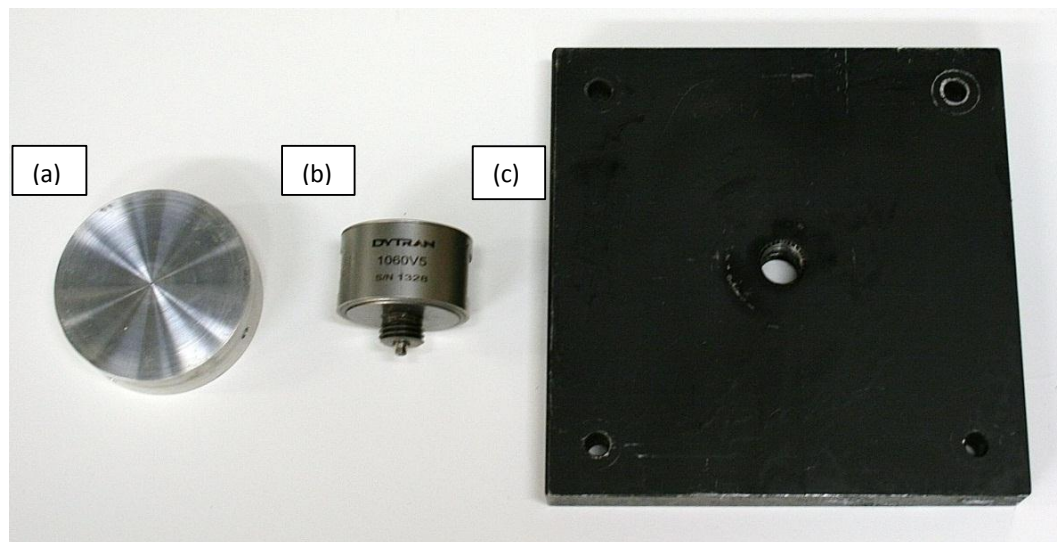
Force cell test fixture: (a) aluminum end cap (b) force cell (c) heavy steel fixture plate
